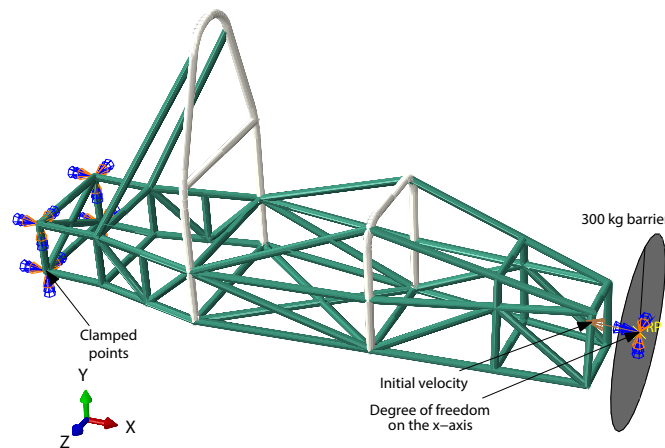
Frontal impact model on the tubular chassis with beam elements.
